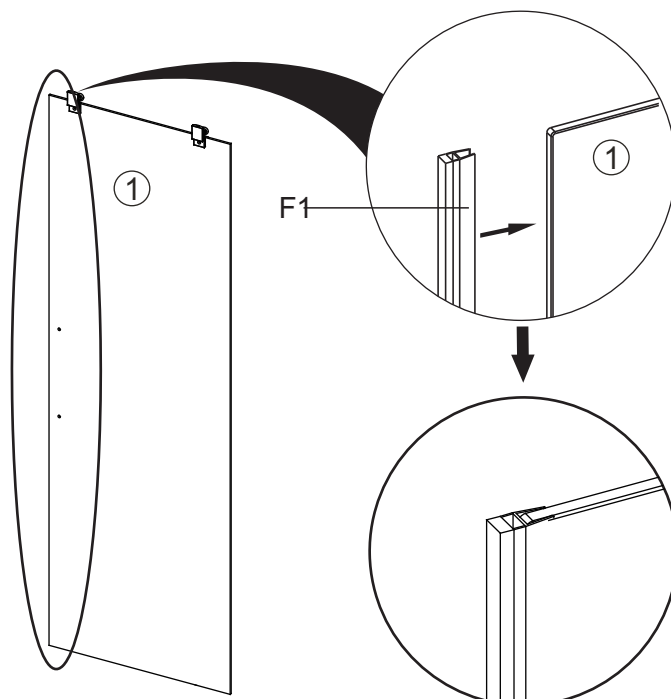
Install the PVC magnetic door seal (F1) on the door panel as shown illustration.
